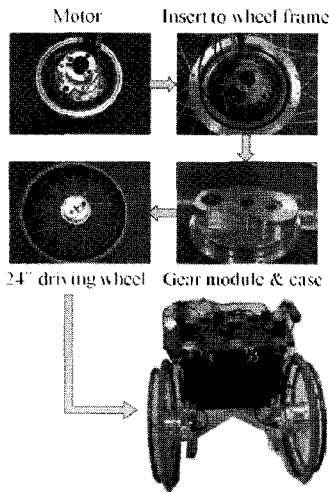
PADW assembly. Motor insert into wheel frame and gear module connect onto motor shaft. Then the wheels and drivers attached to the manual wheelchair
